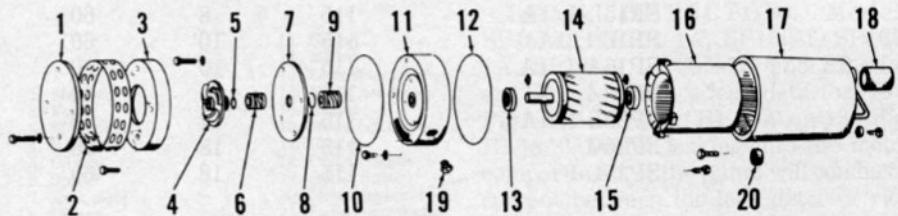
Exploded view of SP3 series submersible pumps.
